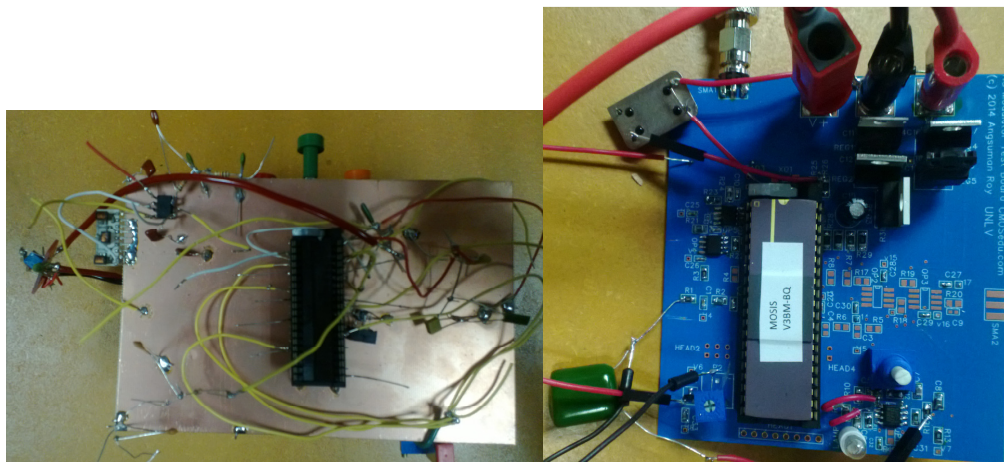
“Deadbug” [17] test board (left) and PCB (right).
